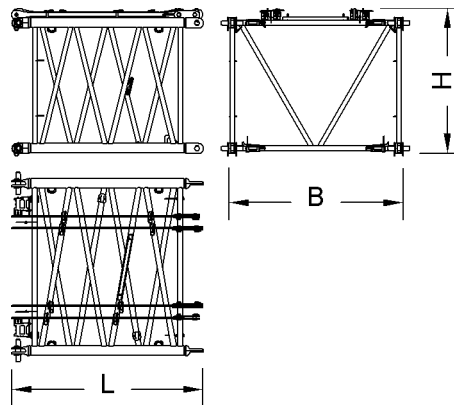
2821 boom section dimensions 10 ft for LR1300/LR1300W
